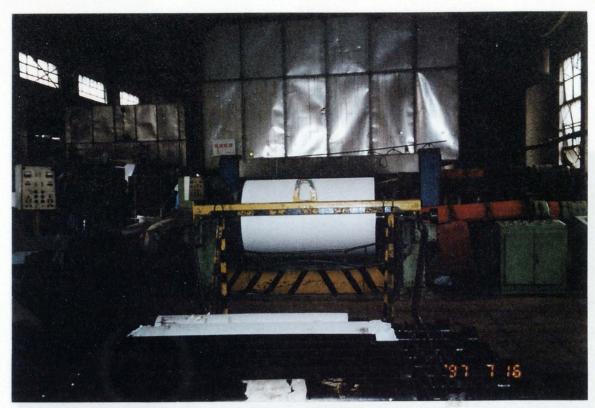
Drying Process Through Use of Steam Heated Rollers
